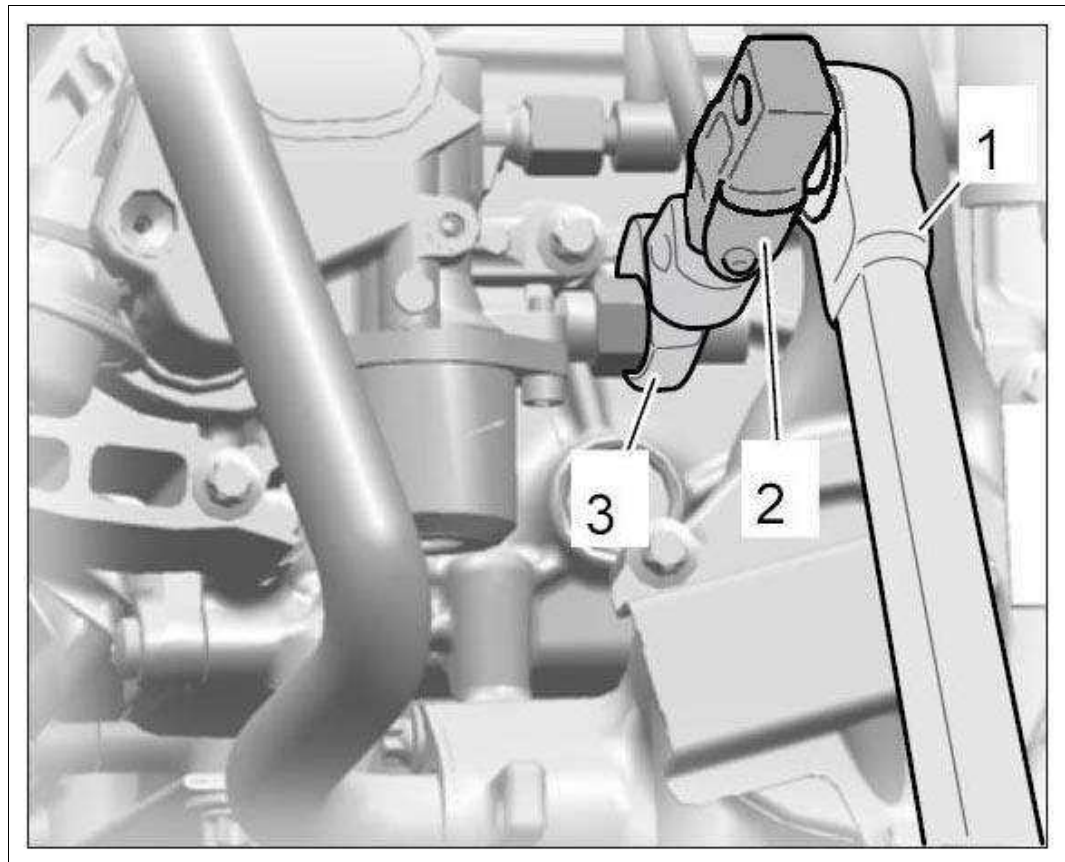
Identifying High-Pressure Pump To Cylinder Head Screws
